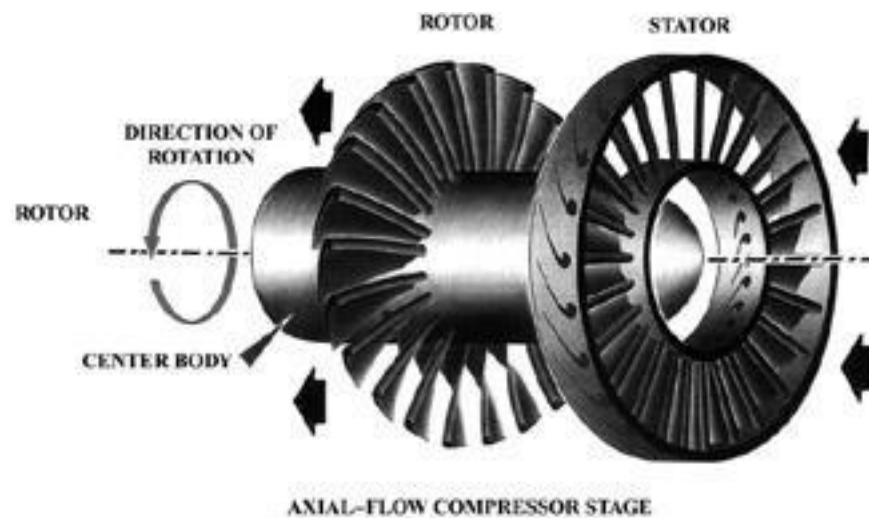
Axial compressor stage assembly with alternative rotor, stator set [23]
